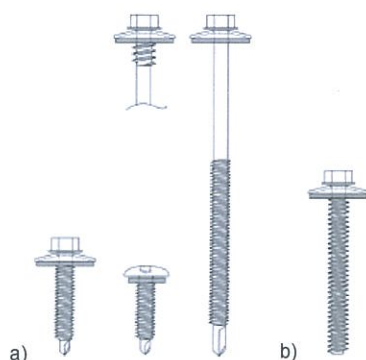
Fastening screws: a) self-drilling screws, b) self-tapping screw
